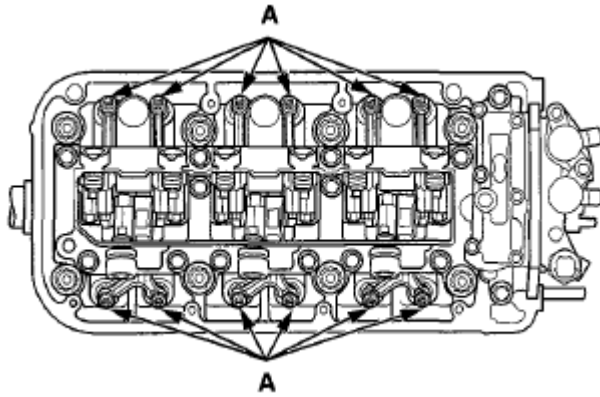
Identifying Rear Rocker Arm Locknuts & Adjusting Screws
